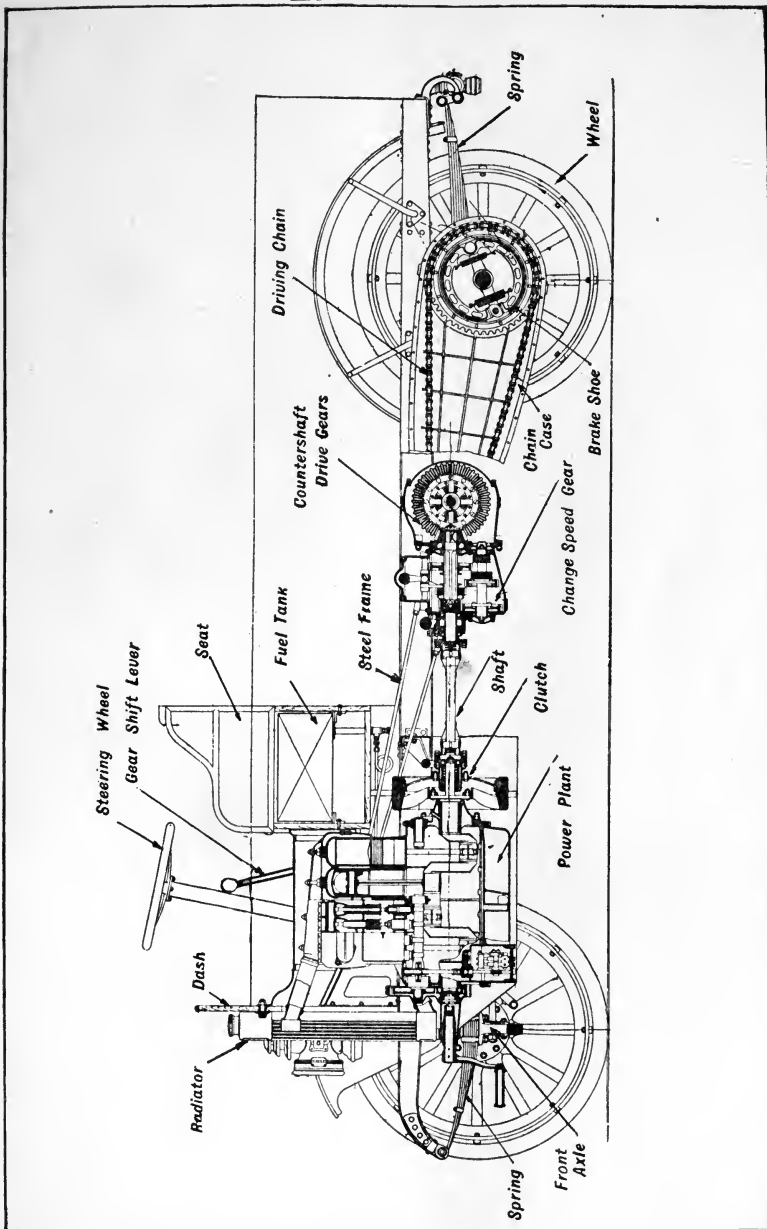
Side Elevation of Light Truck Chassis, Showing Important Mechanism.
